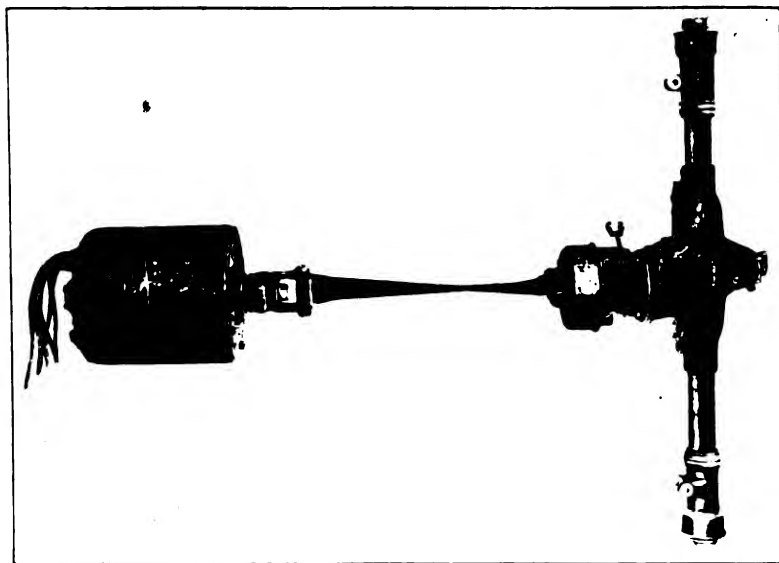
Motor, Drive Shaft, and Jackshaft Assembly for G.M.C. Electric Wagon
